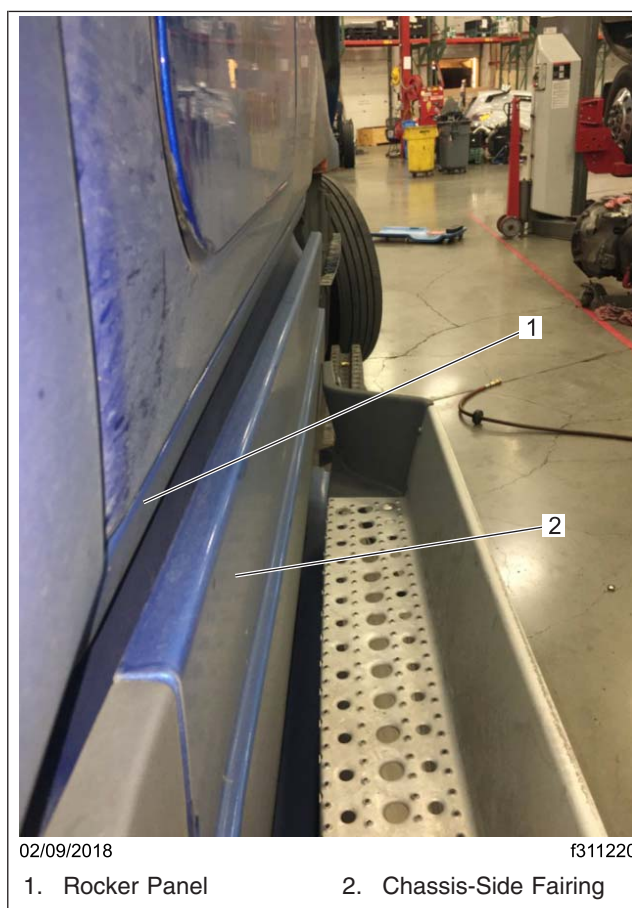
, Location of the Rocker Panel and Chassis-Side Fairing
